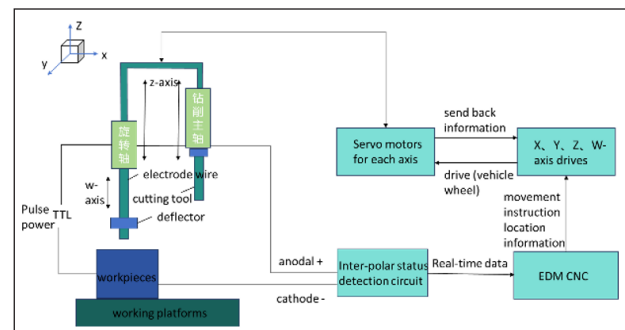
Block diagram of the overall design of the EDM-drilling composite machining system [31].
